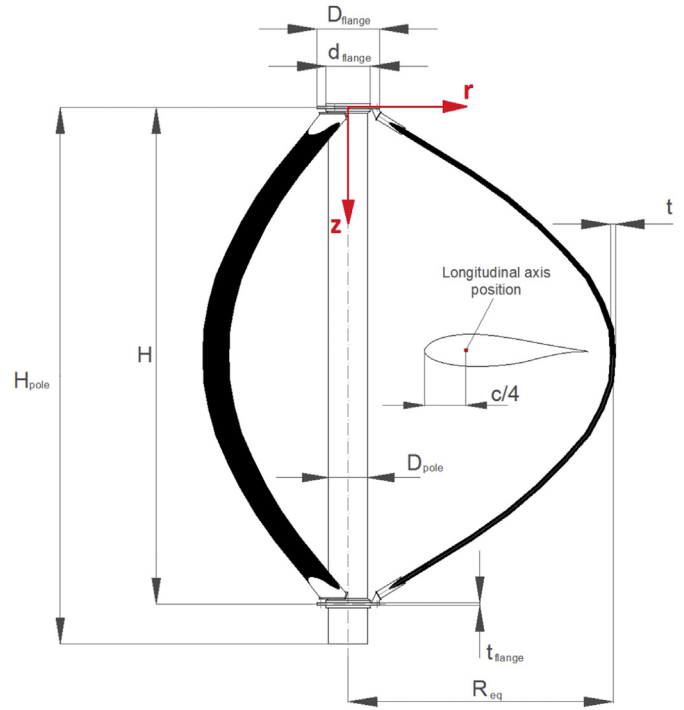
Quoted drawing of the DeepWind demonstrator for wind tunnel testing; a quoted drawing (out of scale) of the blade section is also shown, evidencing the position of the blade longitudinal axis and its cylindrical coordinates ( $r, z$ ) collected in Table 3.
